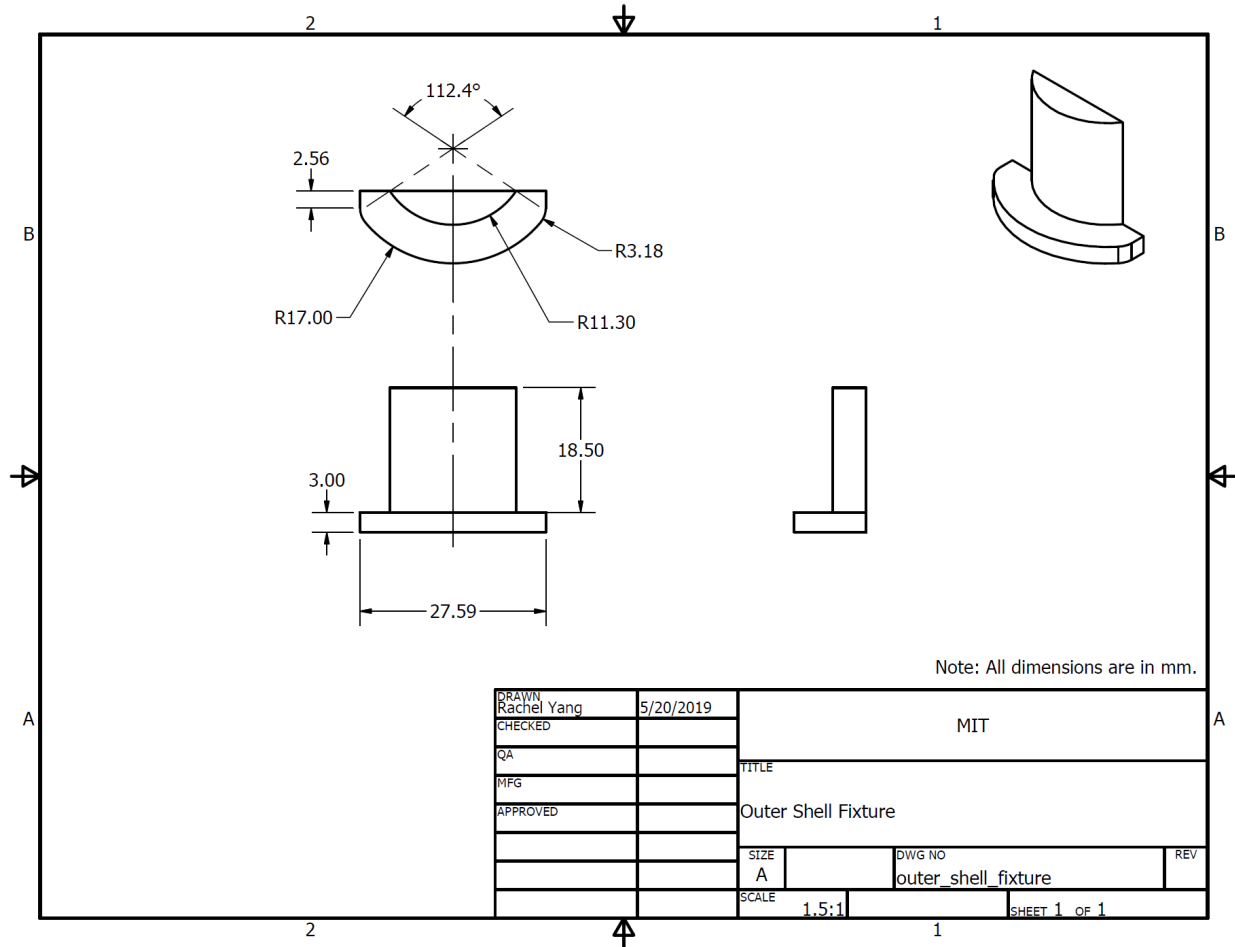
CAD drawing of the custom 3D-printed fixture for assembling the outer shell sections (see Fig. E.1c)
